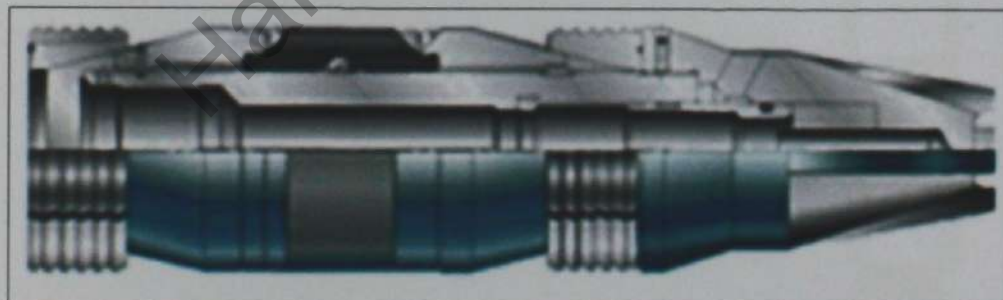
Cement retainer (J.D. Arthur 2011).
